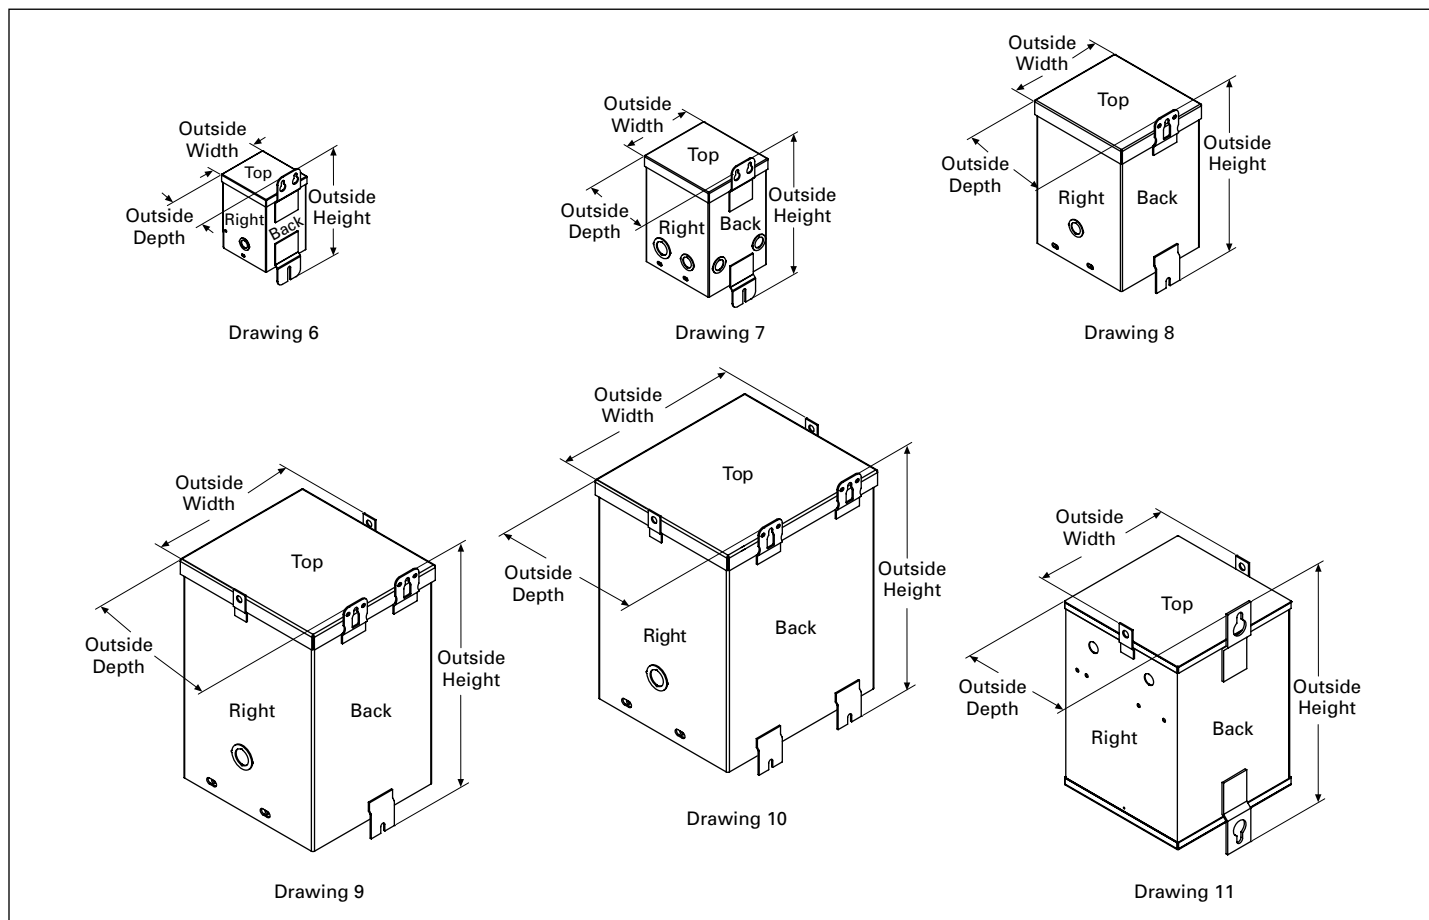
Enclosure Dimensional Drawings—Encapsulated Transformers (Type EP)
